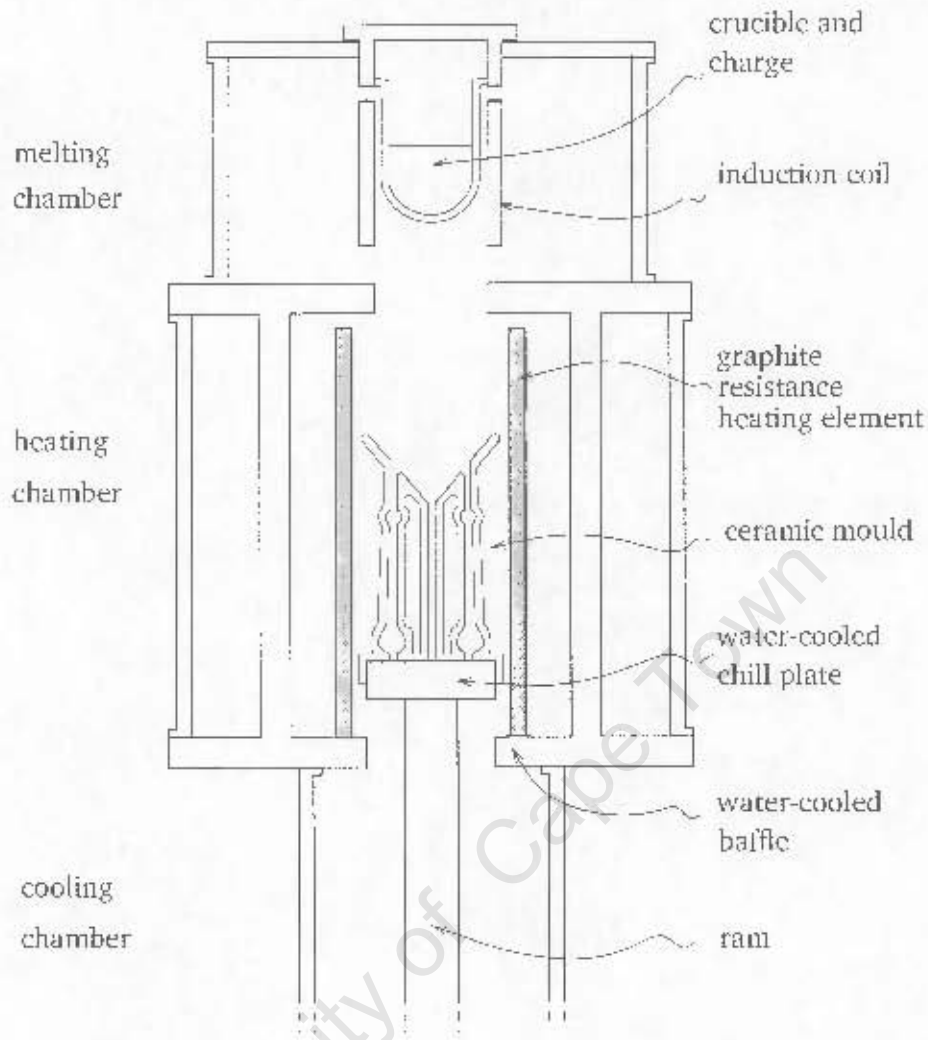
Diagram of a directional solidification investment casting process using a shell mould
